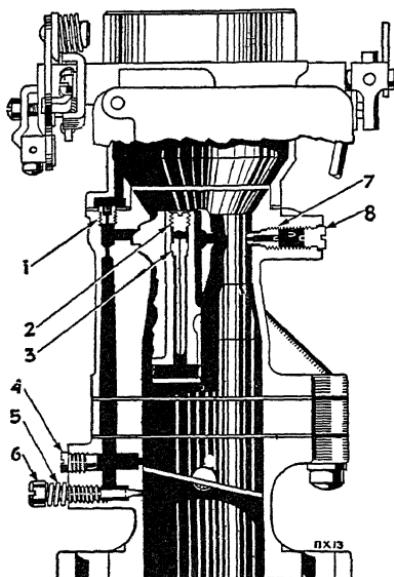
Front Cross-Section of Plymouth-Chrysler Carburetor
